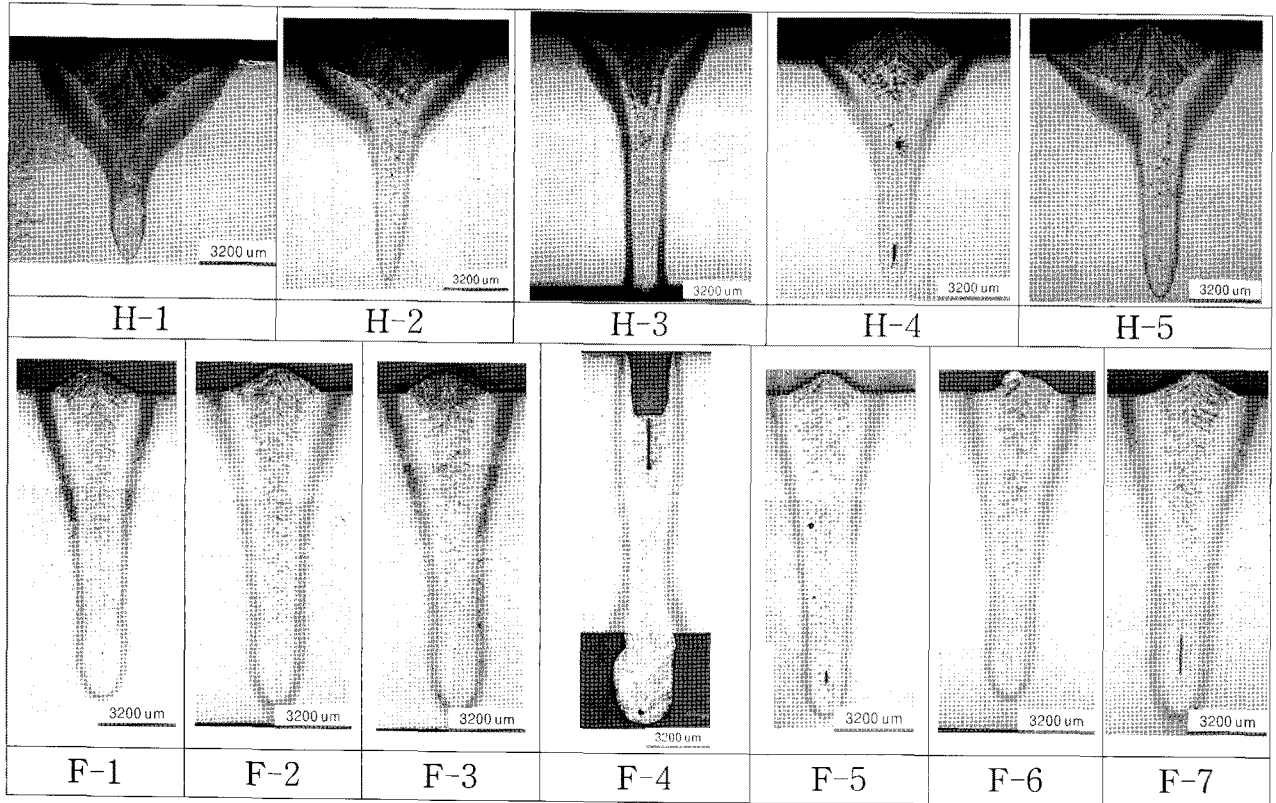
Microstructure of cross sections of welds after fiber laser(F) and hybrid welding(H)
